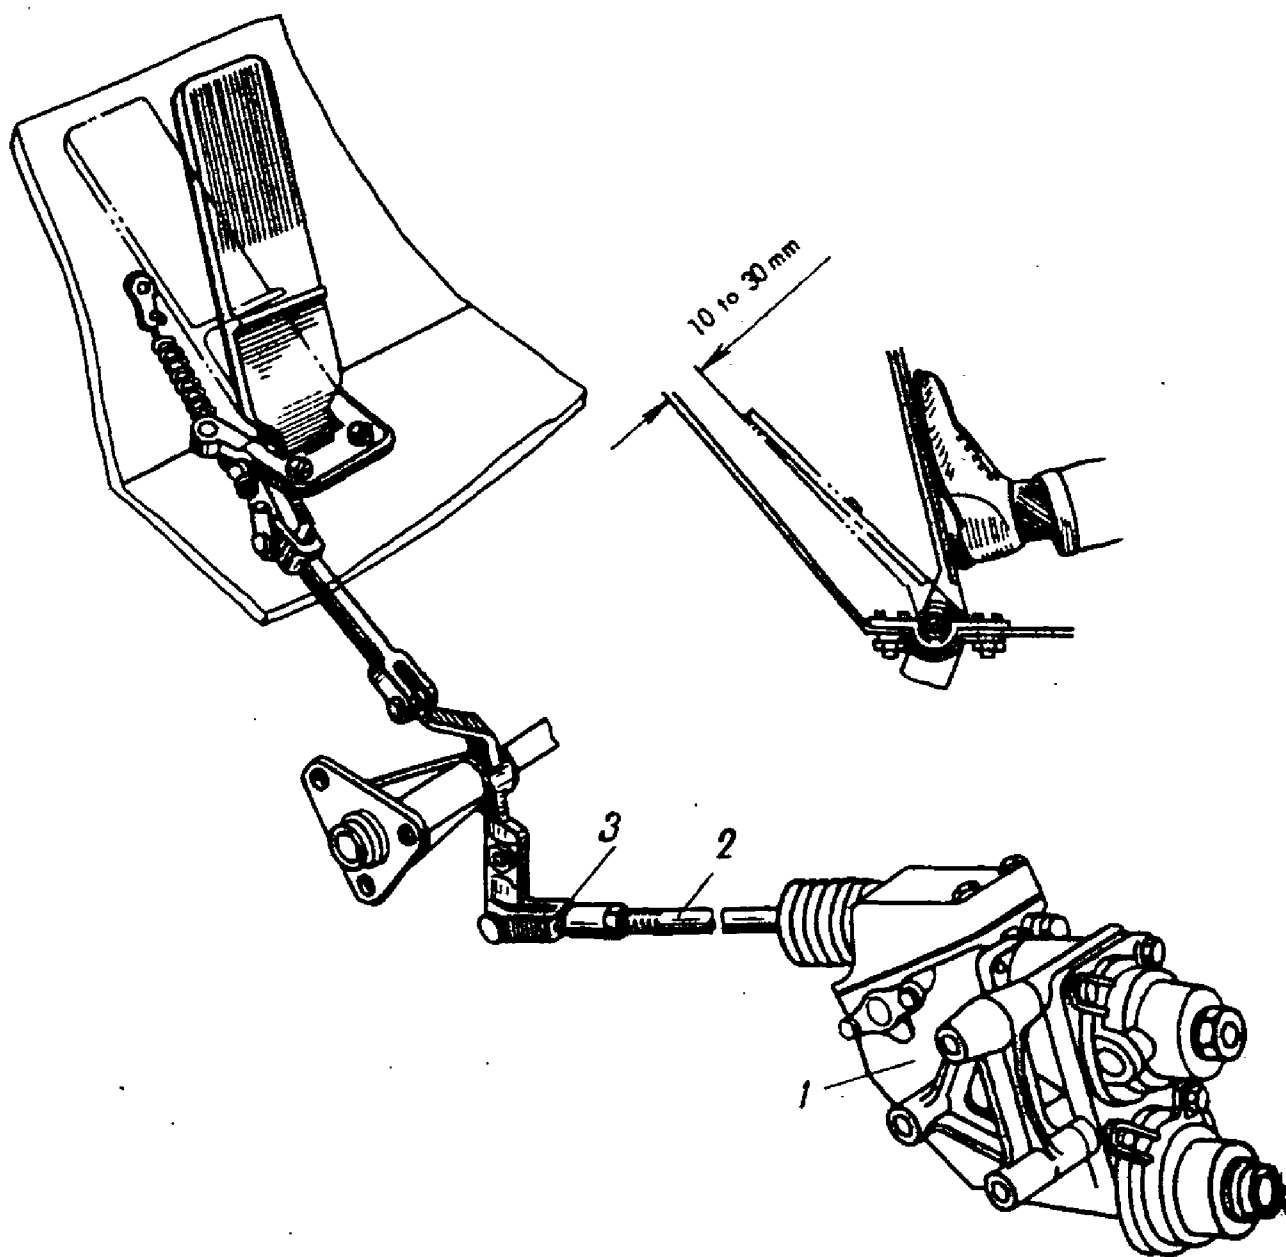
METHOD OF ADJUSTMENT OF WHEEL AIR BRAKE LINKAGE
